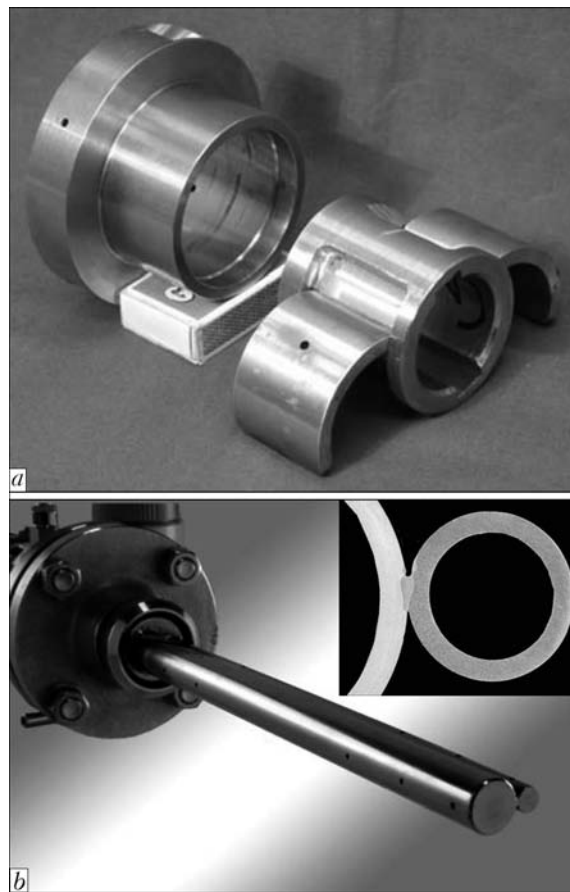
Elements of hydraulic jaws: quench-tempering steel, weld depth of 4 mm, $P = 3800$ W in helium (*a*); probe for flow measuring system: material X2CrNi18-9, tubes 12/6/1200 + 25/6/1200 mm at $P = 1700$ W in argon (*b*)
